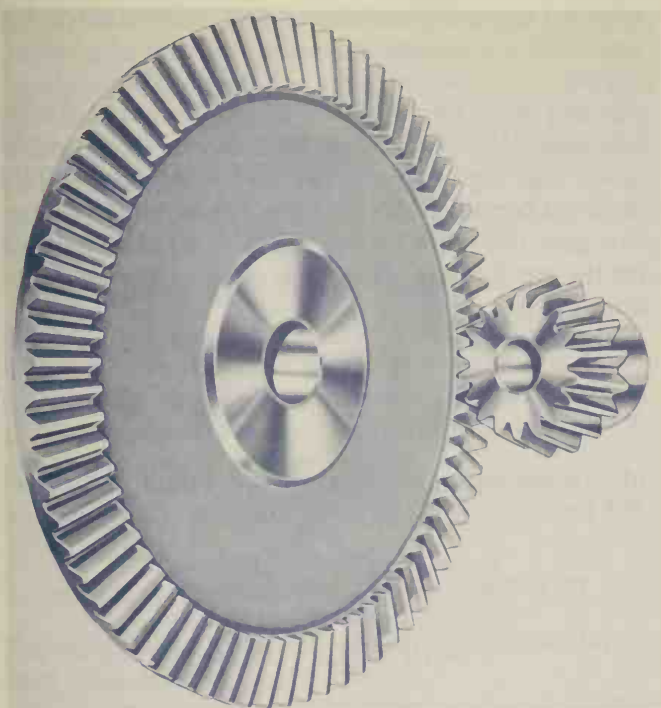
Spur gear/pinion gear (Courtesy Boston Gear)
